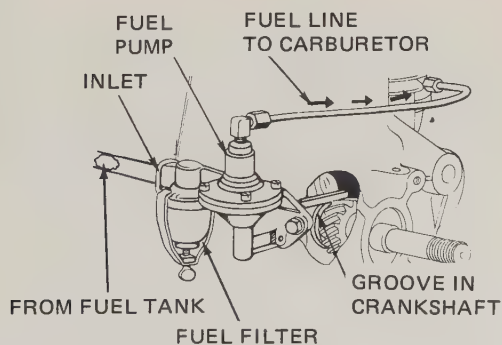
Pressure-feed fuel system for a small engine. The engine has been partly cut away in the illustration so the position of the pump lever on the groove in the crankshaft eccentric can be seen.
